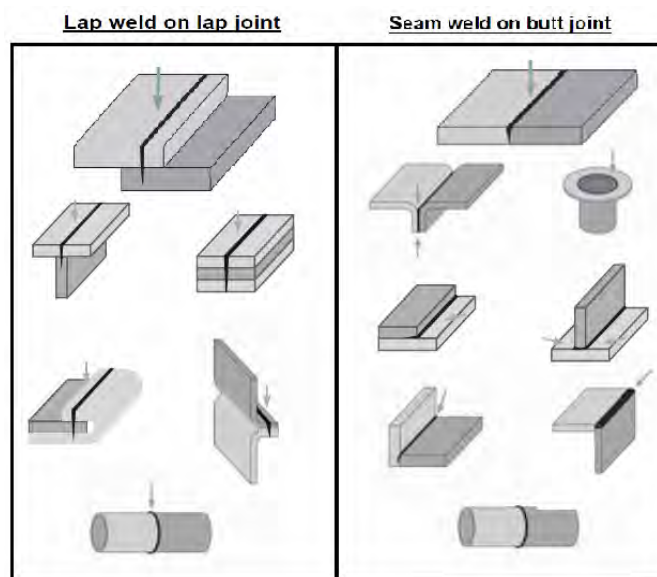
J-10: Common seam and joint types for laser welding of automotive applications^{T-9}
